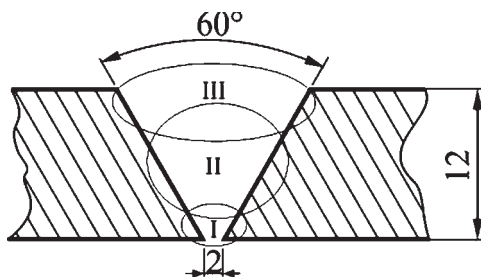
Shape and dimensions of the groove and the order of welding.
